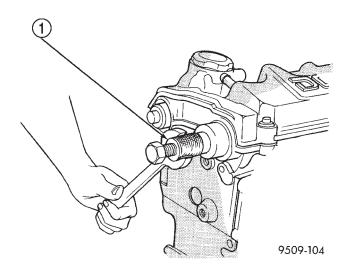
Camshaft Oil Seal - Removal With C-4679A
